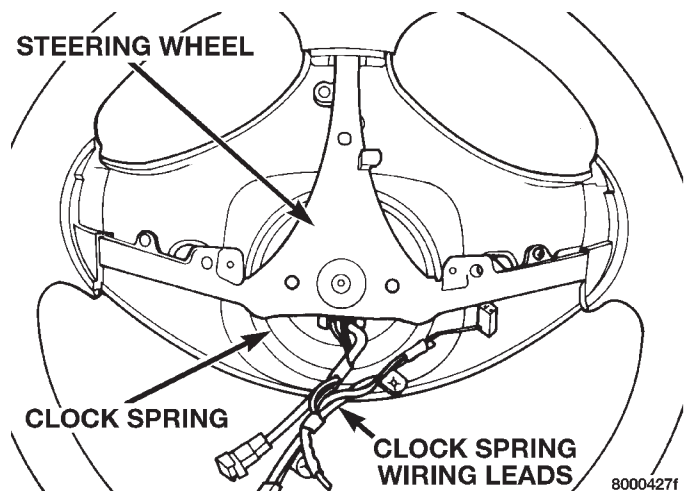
Steering Wheel And Clock Spring Wire Routing
